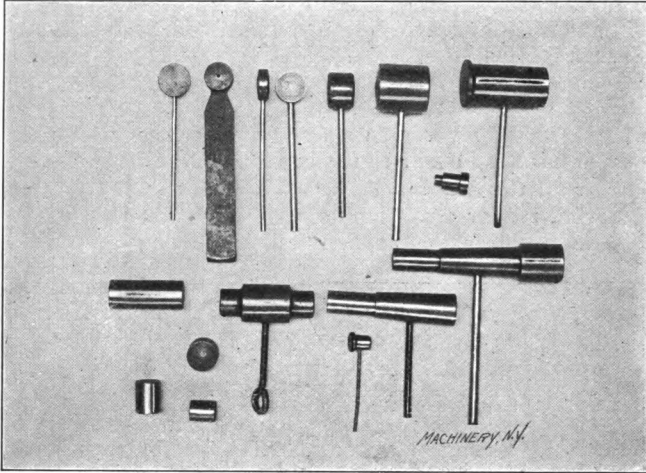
"Typing" Tools Used by Die-sinkers to Form Circular Cavities
